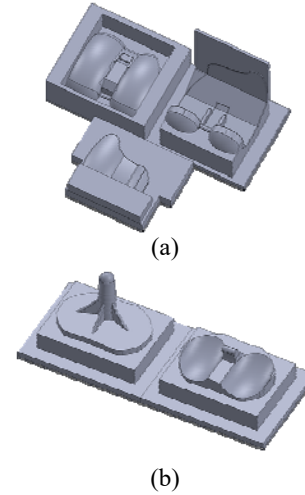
CAD model: (a) Femoral component mold and (b) Tibia component mold.
